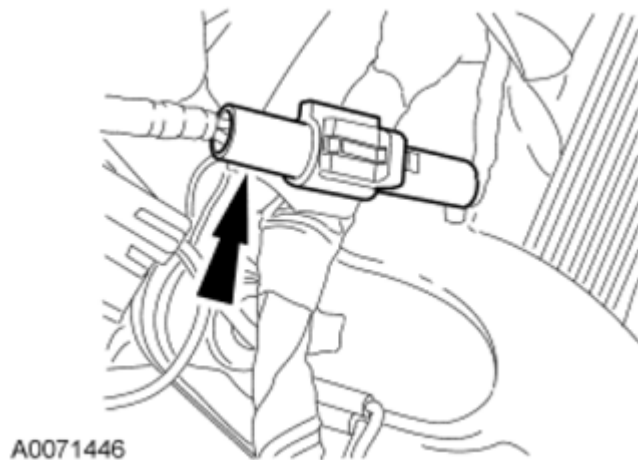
Locating Camshaft Position (CMP) Sensor Electrical Connector
